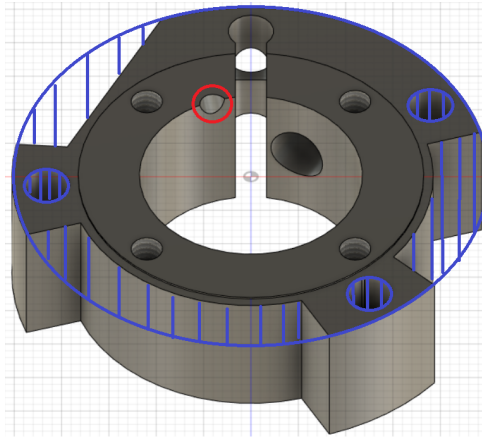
The outlet slot of the valve in the compressor housing indicated with the red circle and the empty spaces of the compressor housing which is assumed to be filled with steel as mentioned in chapter 2.3.6.
